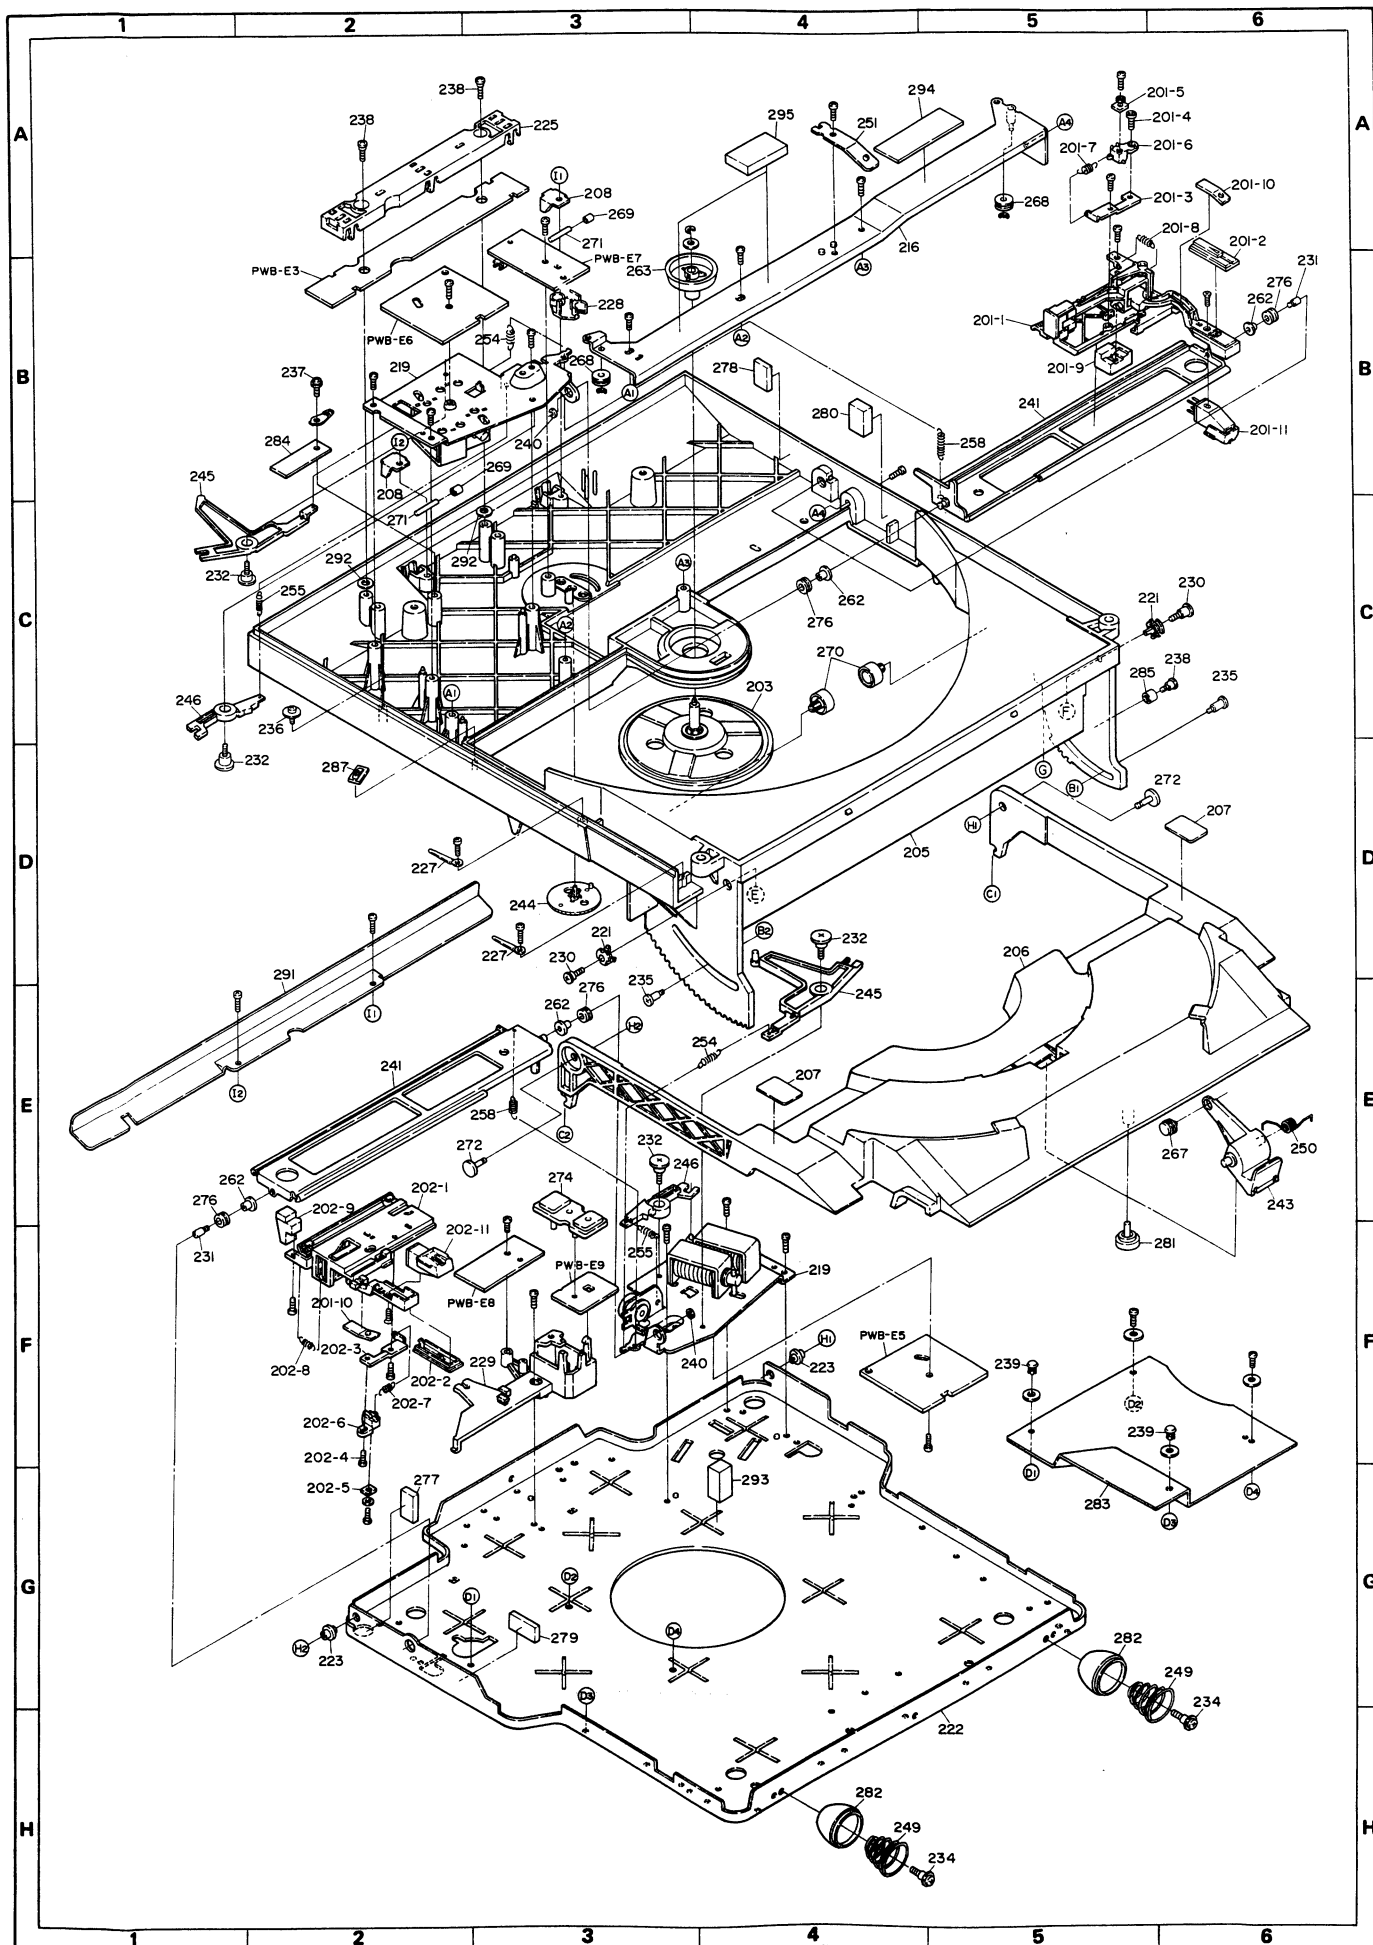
PLAYER MECHANISM EXPLODED TOP VIEW
